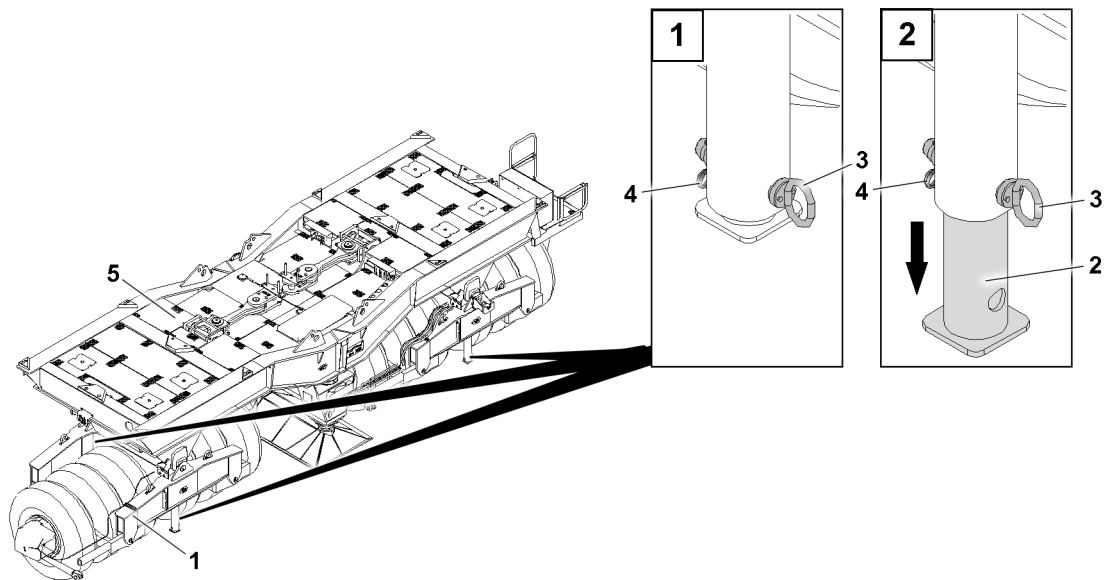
Disassembling the first wheel set – extending the auxiliary support
